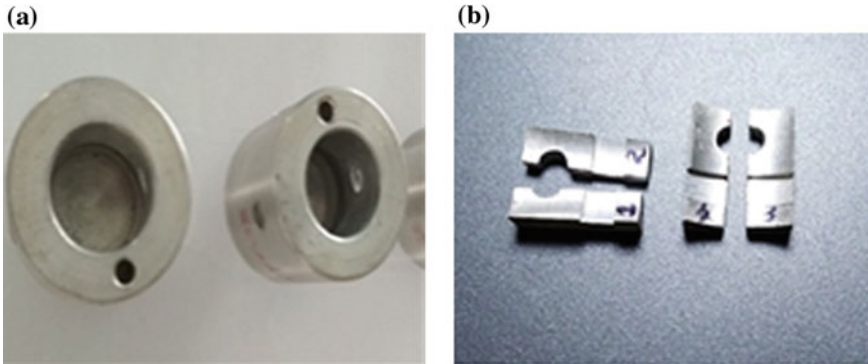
a Aluminum 6082 specimen before sample preparation. b Specimen for investigation of burr value (WEDM)
